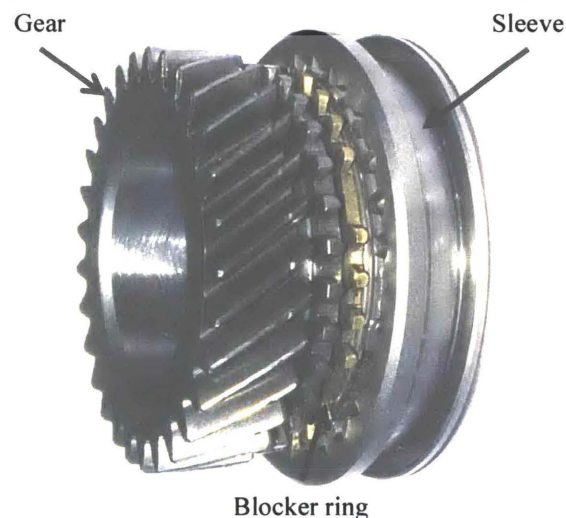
Baulk-ring type synchronizer and gear from a Honda vehicle
